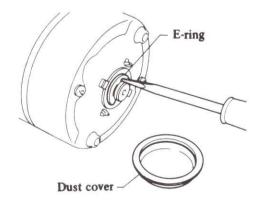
Starter motor dust cap and E-ring (Sec 10)
